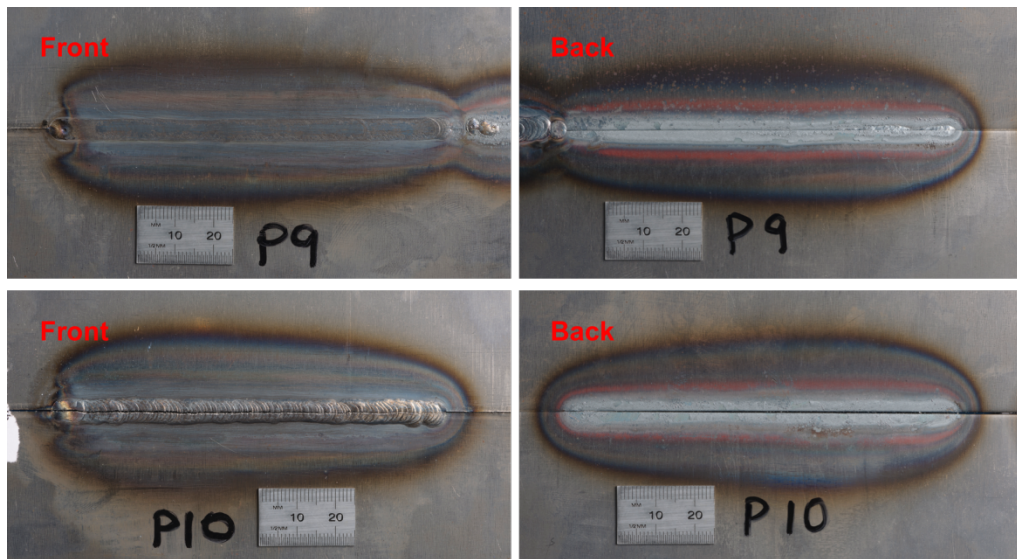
Photographs of the weld pass 9 and 10.
